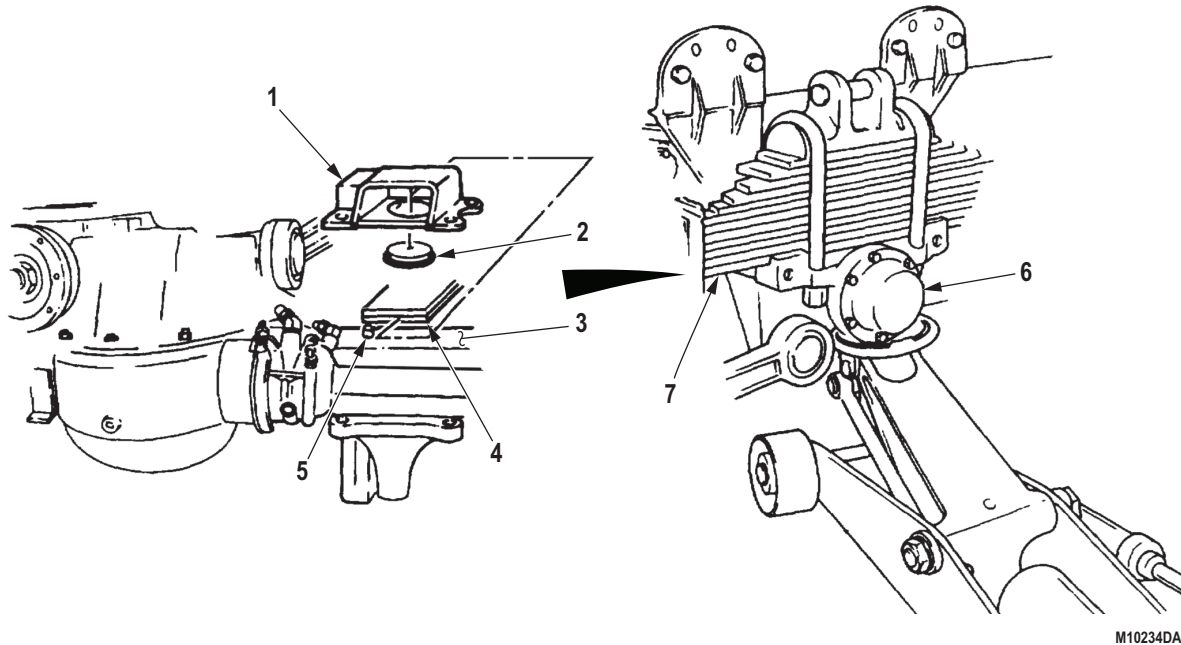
Rear Axle Spring Seat Wear Pads and Upper Bracket Installation.
